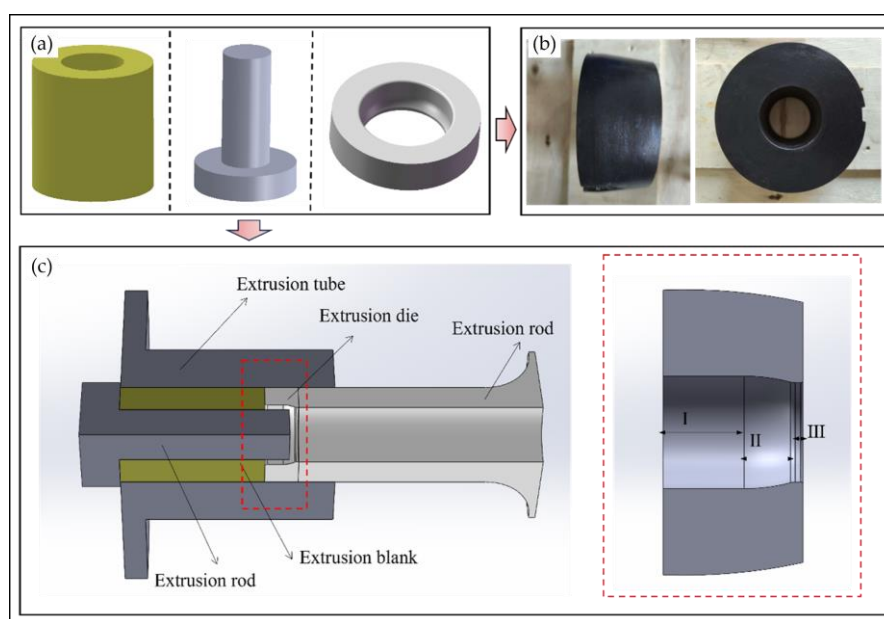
(a) Models of the billet, punch, and die; (b) Extrusion die; (c) Quarter extrusion model
